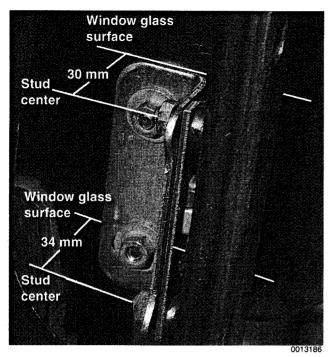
Rear guide rail to rear guide bracket initial adjustment. Top should be set at 30 mm (1.2 in.) from glass to stud center; bottom should be set at 34 mm (1.3 in.) from glass to stud center.
